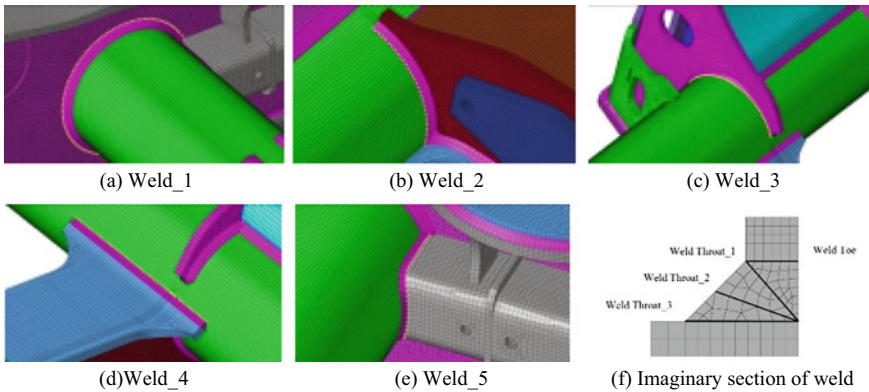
Key fatigue welds of frame and imaginary section of weld
